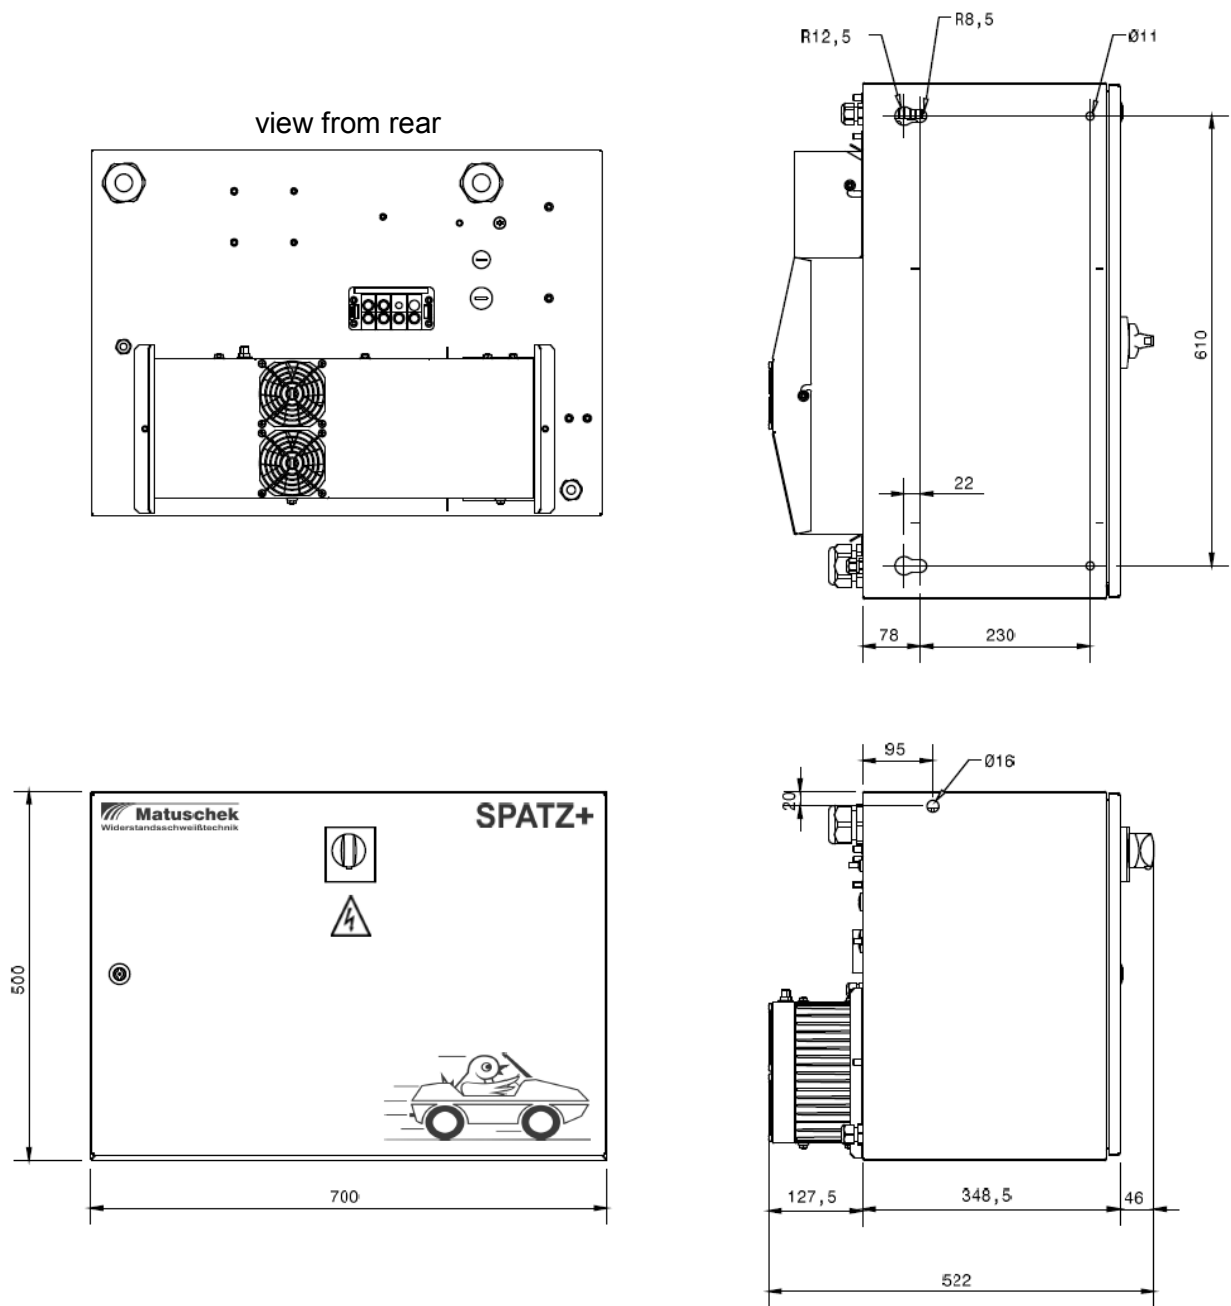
Dimensions in mm of the SPATZ+ CL-RS cabinet for one SPATZ+ weld timer and components for one servo drive
